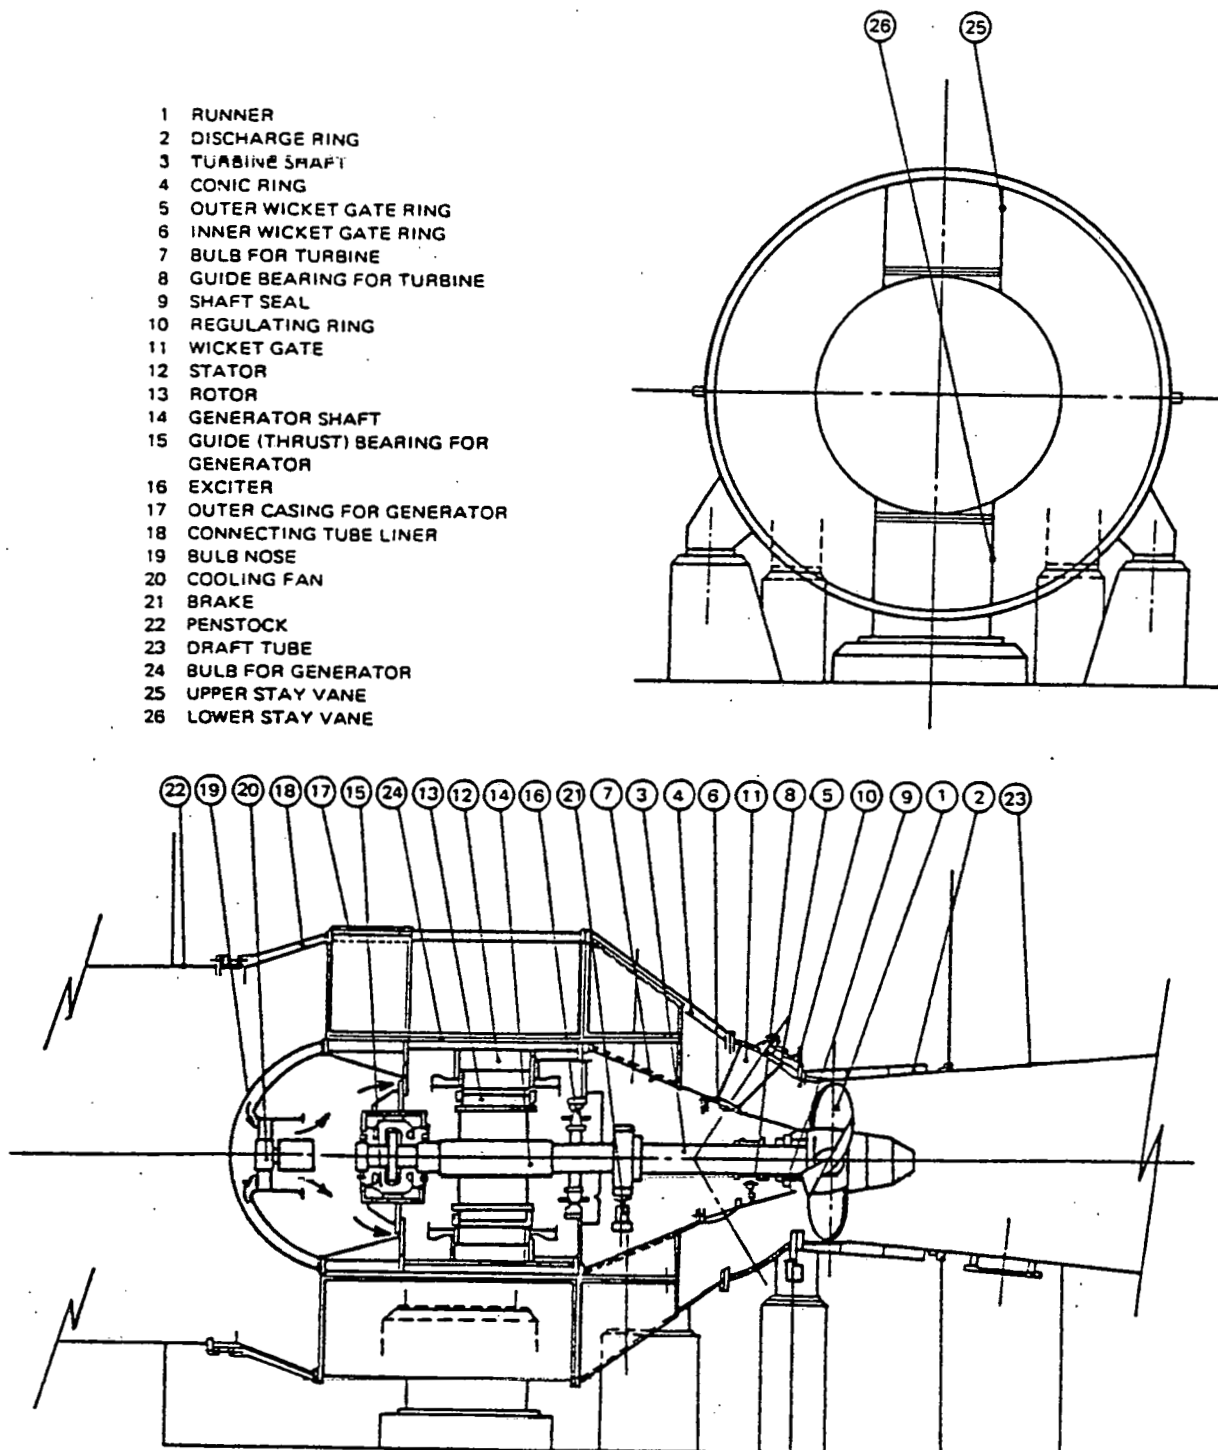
Sectional Drawing of Bulb Turbine-Generator
